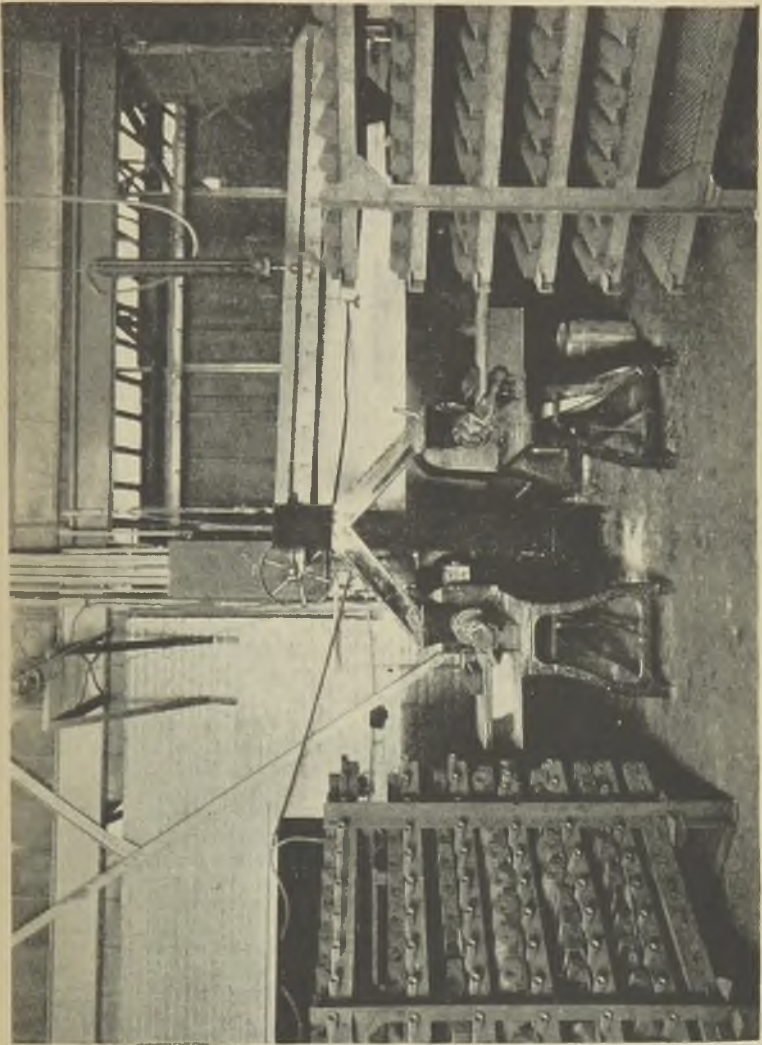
AN EXTRUDING MACHINE FOR THE PRODUCTION OF TWO SIZES OF CYLINDRICAL CORES.
